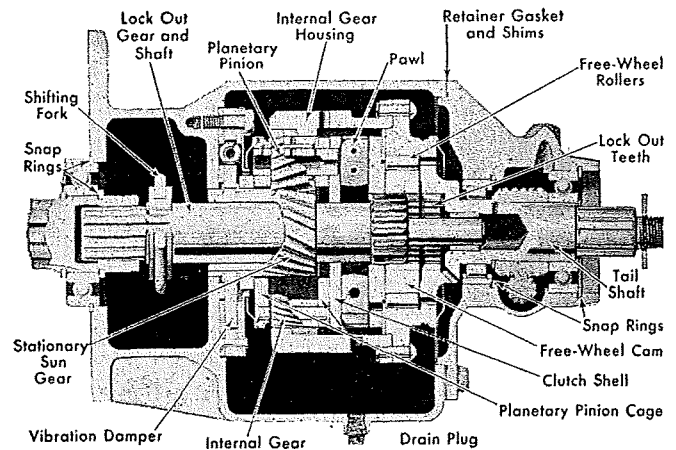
Group No. 28 Overdrive on 1935-36 Series 20 and 80
